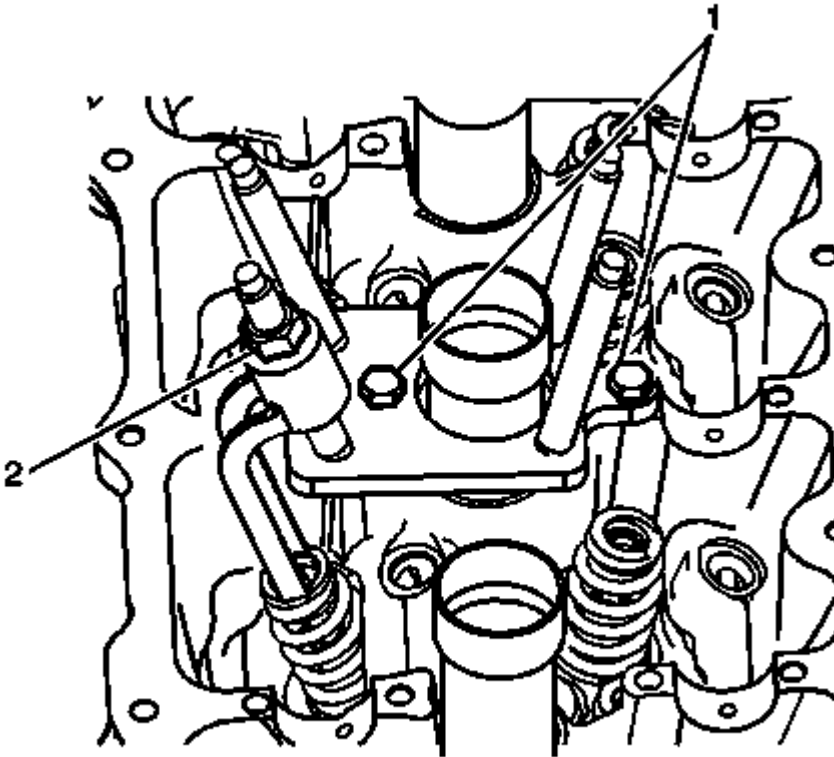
Identifying EN 46116 & Valve Stem Seal
